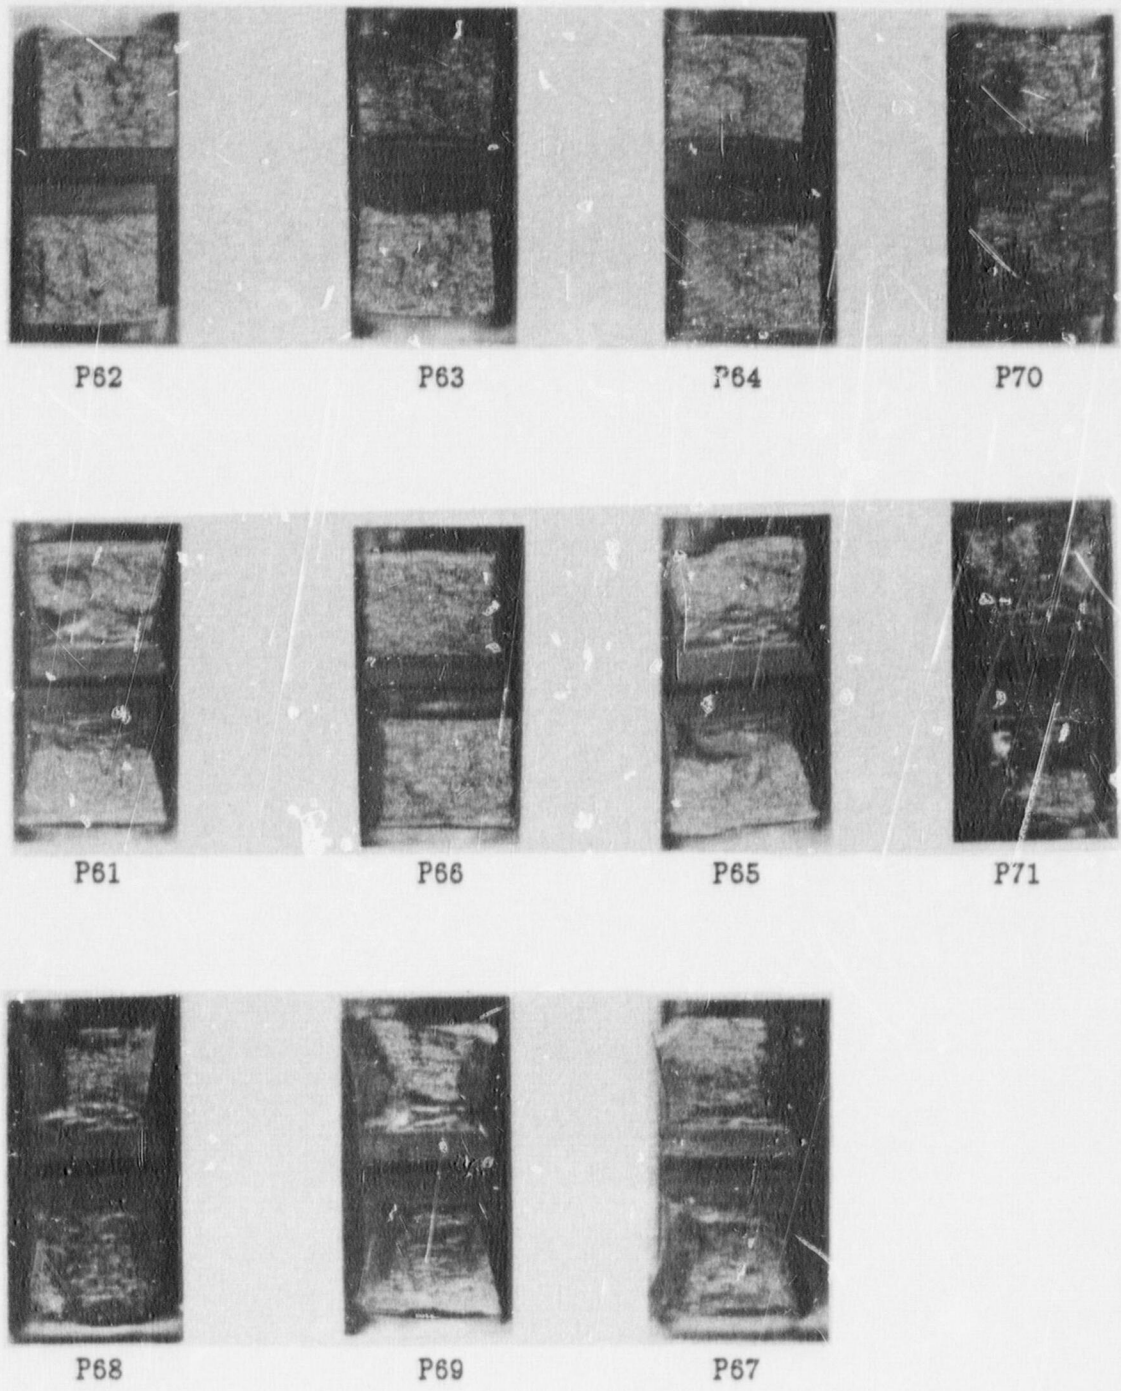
Charpy Impact Specimen Fracture Surfaces for Kewaunee Reactor Vessel Shell Forging 122X208 VA1 (Tangential Orientation)
